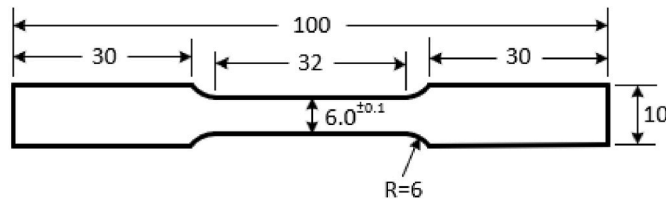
Dimensions (in mm) of test samples according to ASTM E8/E8M standard.
